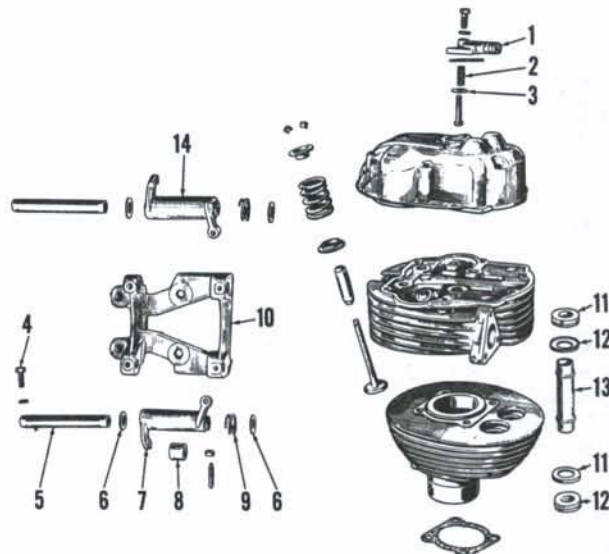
Exploded view of the cylinder head and associated parts.
